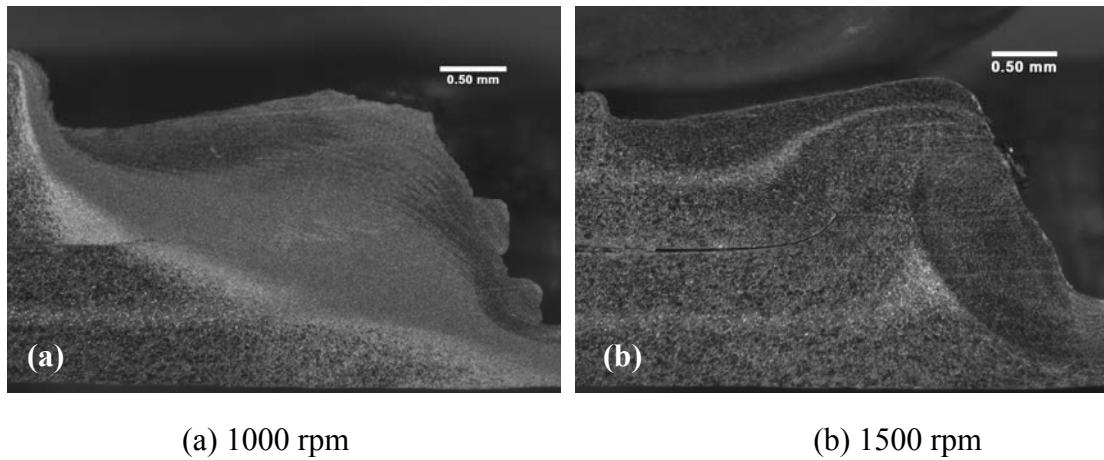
Optical macrographs of cross sections of AA6016 spot welds.
